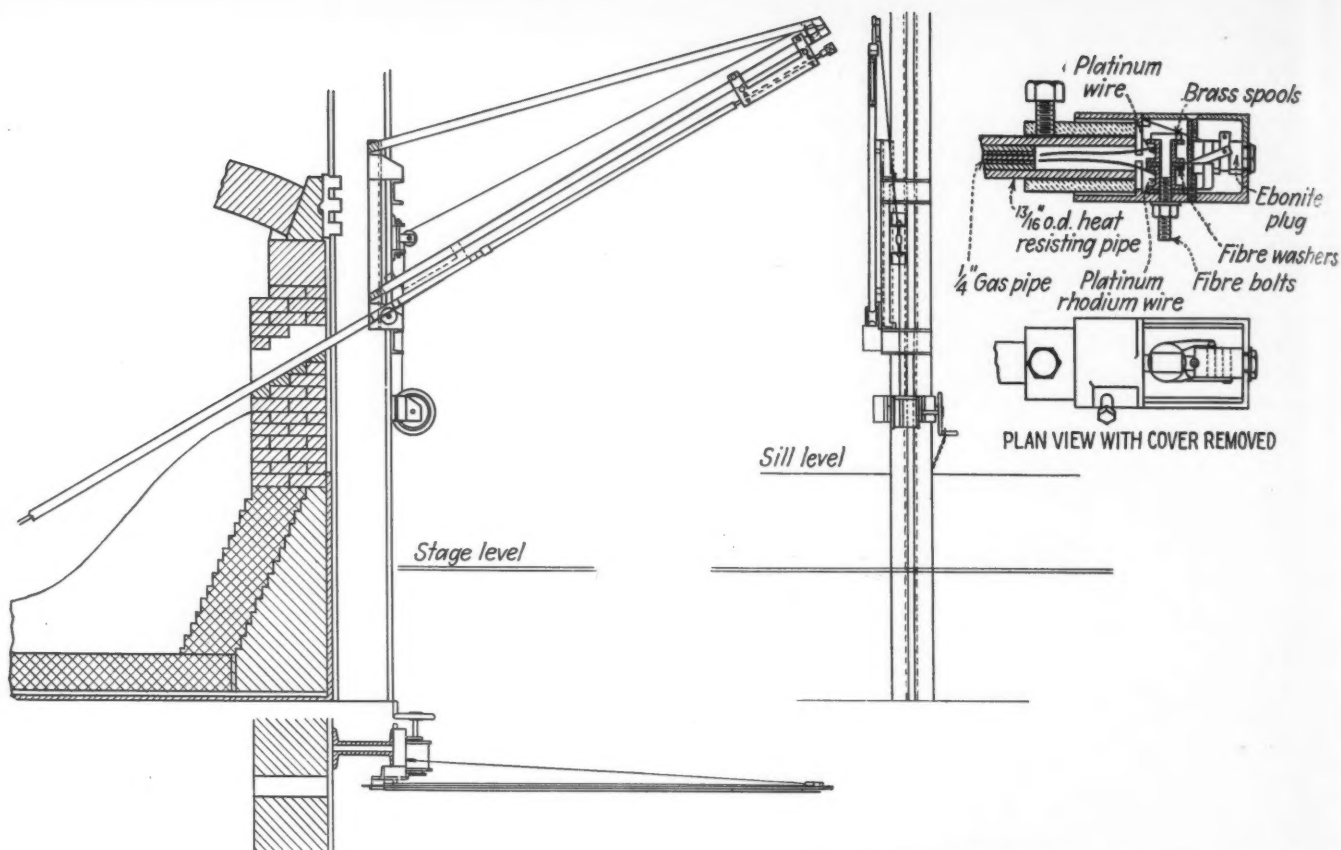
Detailed sketch of a thermocouple arm assembly.
